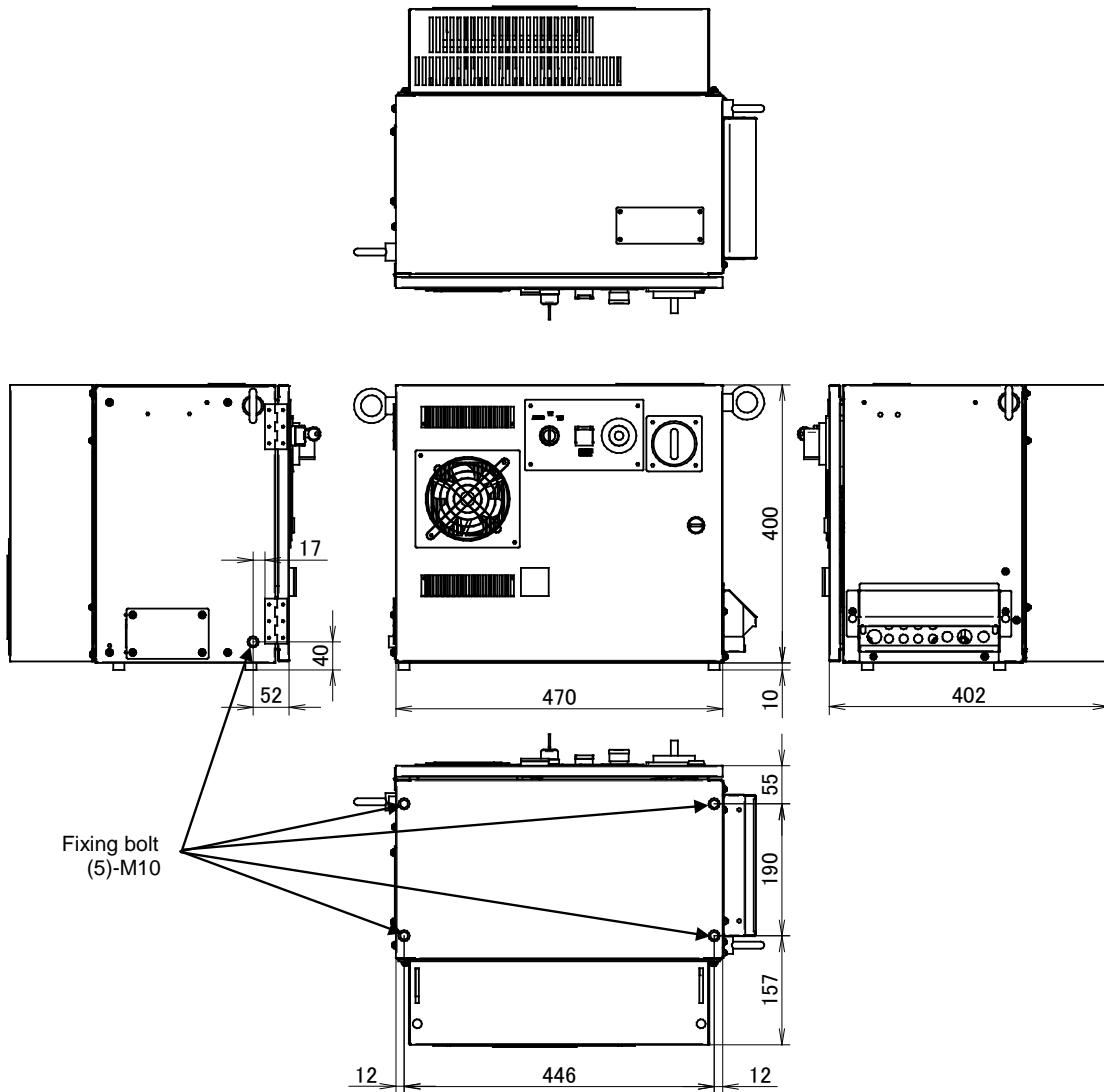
(b) External dimensions (Medium / Large size)
